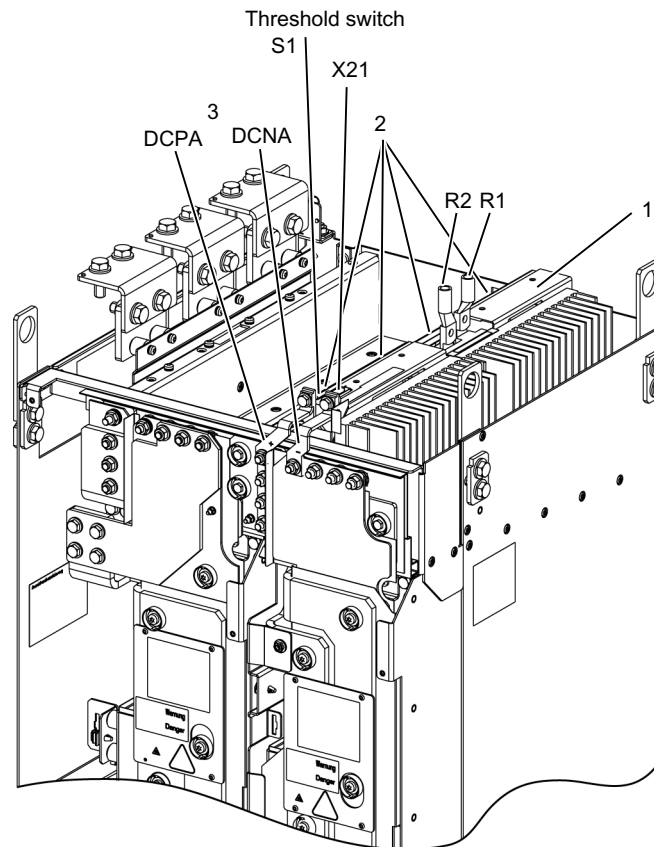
Installing the Braking Module in a Smart Line Module / Active Line Module / Motor Module, frame size HX
